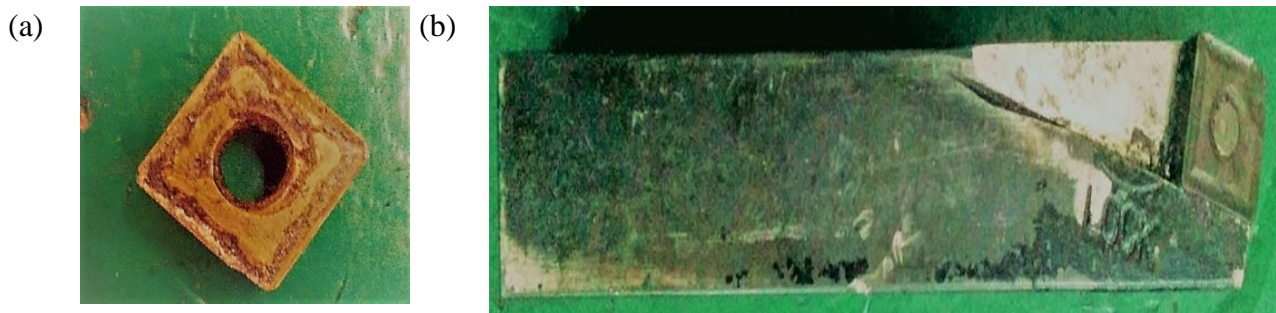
(a) Carbide coated insert (b) Tool Holder
